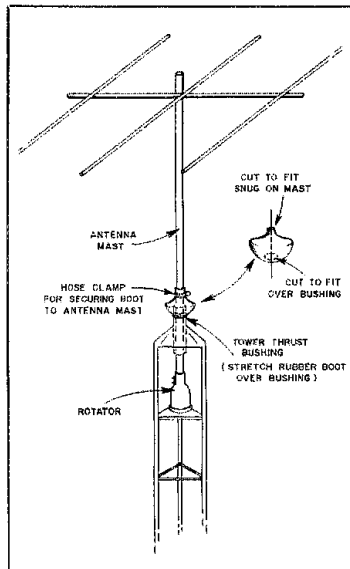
WB2PXL uses a rubber toilet-tank ball to form a protective boot for the thrust bushing on his tower.
